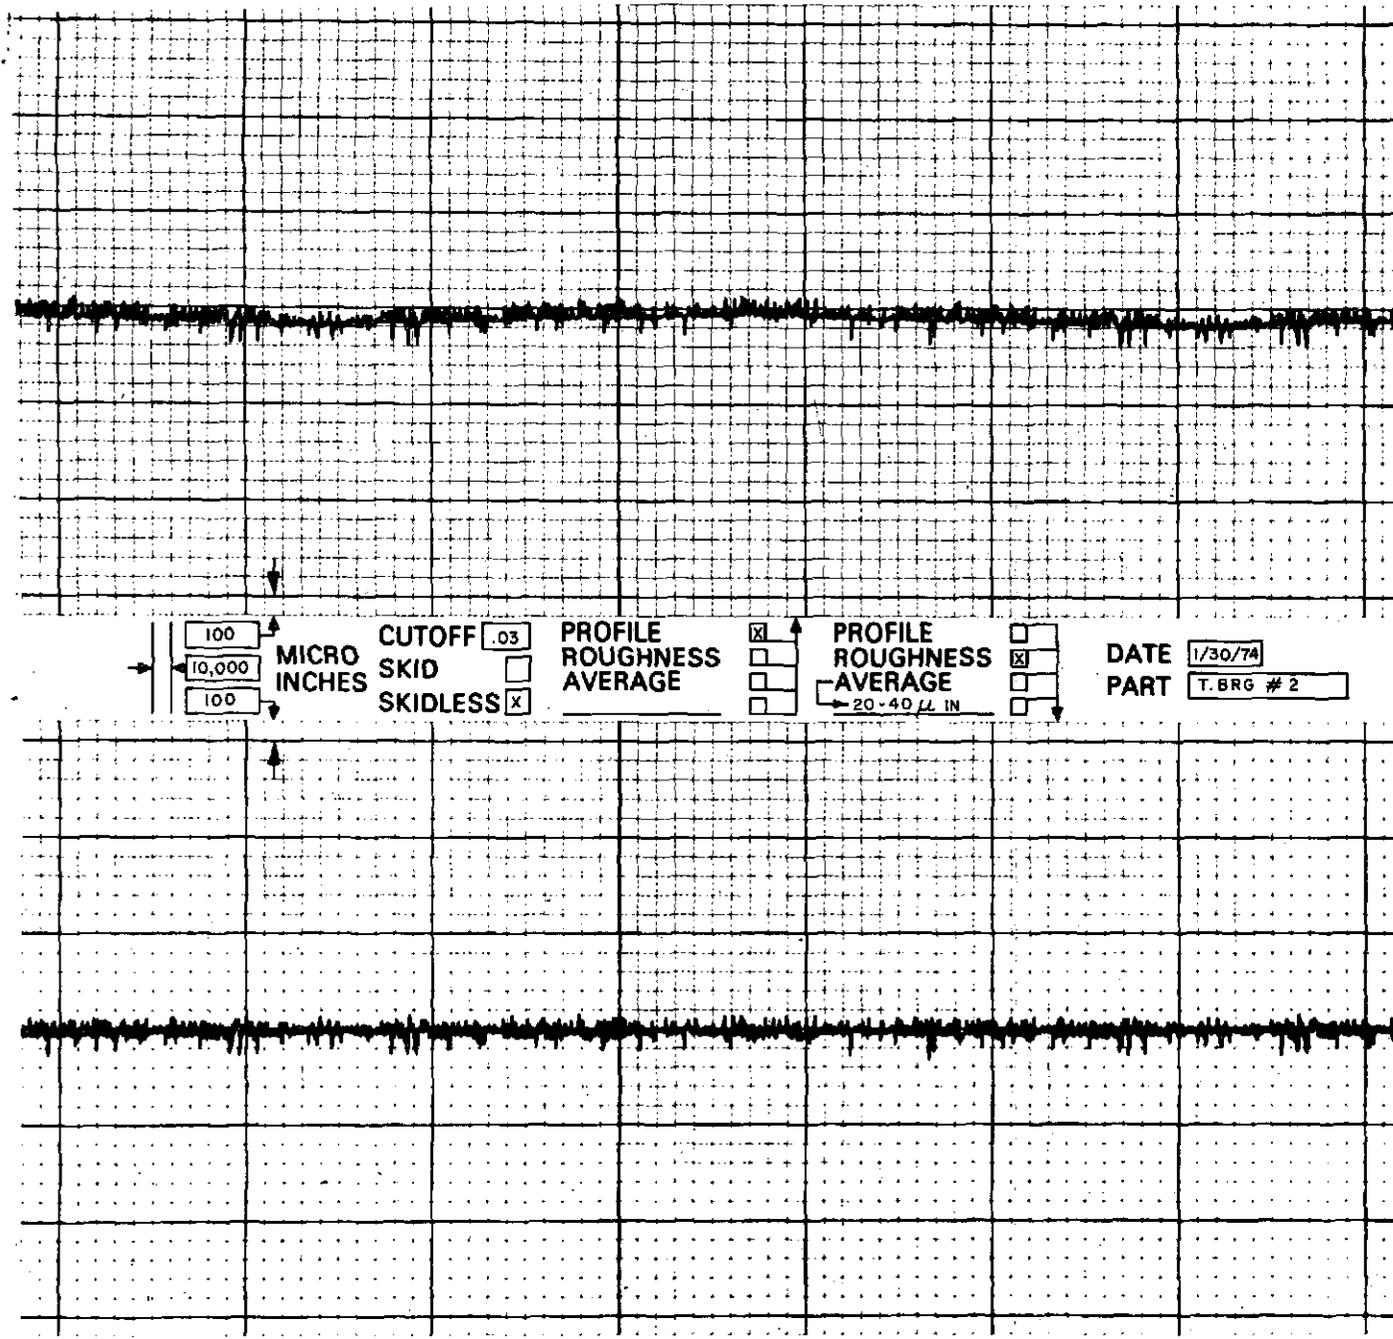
Surface Finish, MoS₂ Coating Thrust Bearing No. 2, After Grinding to Required Coating Thickness
